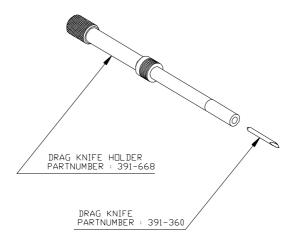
DRAG KNIFE ASSEMBLY
